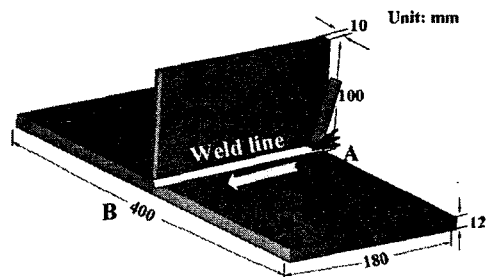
Illustrative problem of fillet welding of two plates
